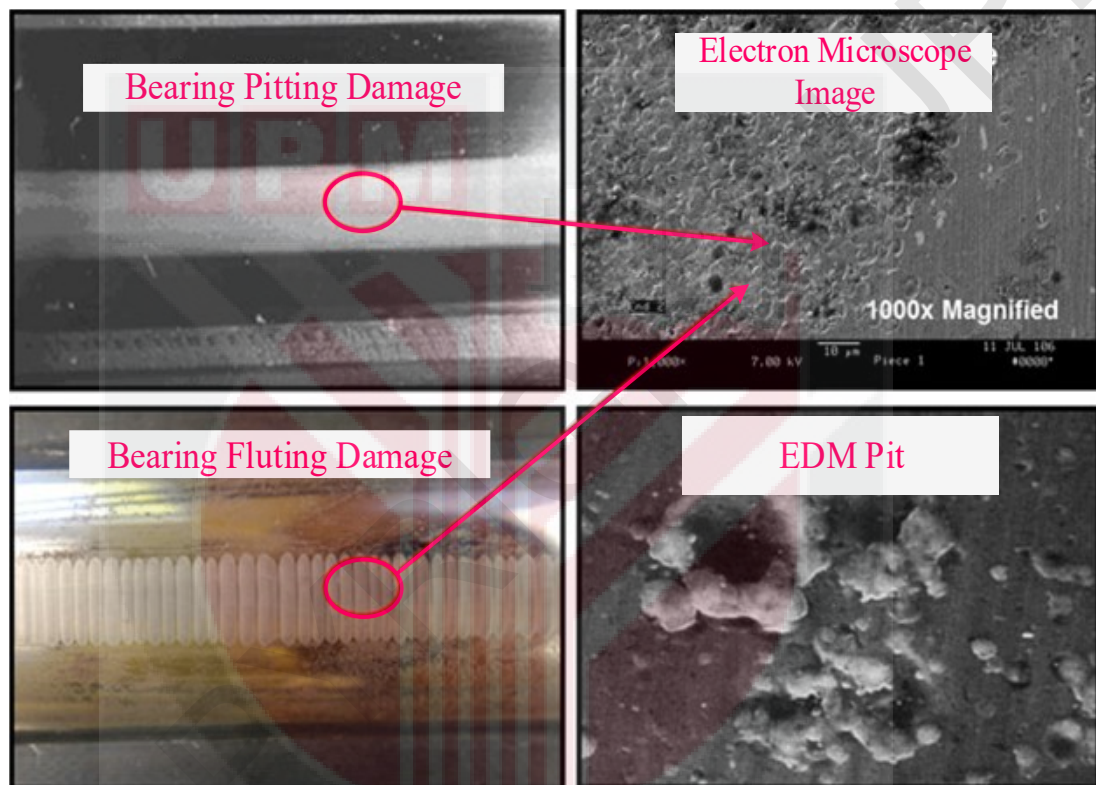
Serious Bearing Damage Accidents
